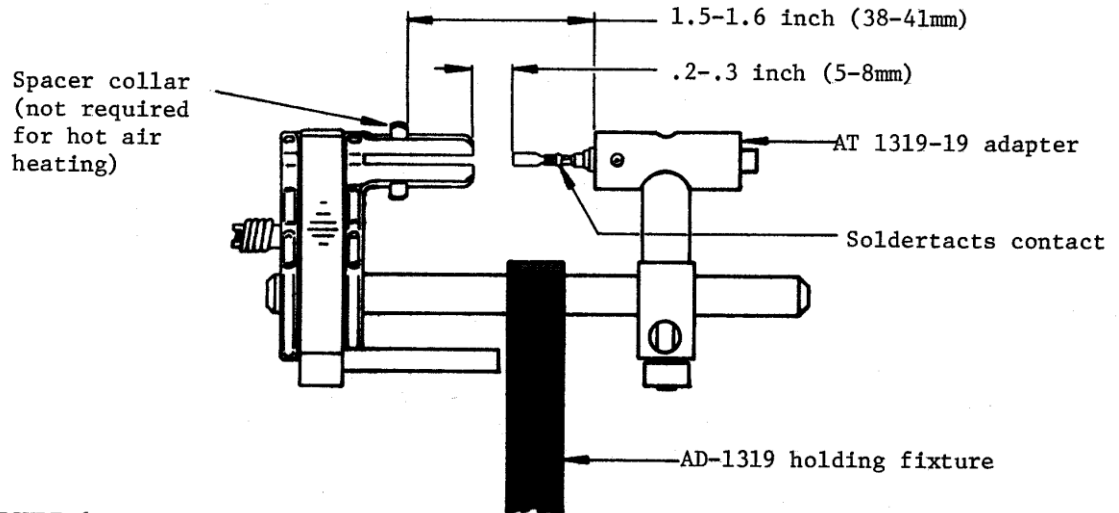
SET-UP DIMENSIONS FOR AD-1319 HOLDING FIXTURE
